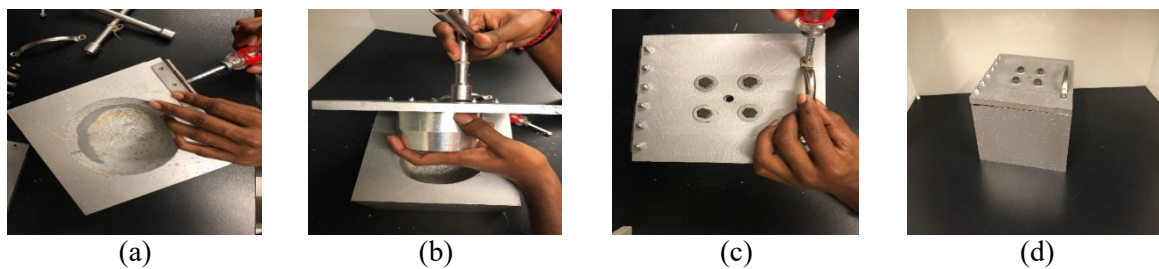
Process of assembly; (a) Hinge connected to mold cavity, (b) Compression mold connected to upper plate, (c) Handle screwed to upper plate, (d) Complete mold
